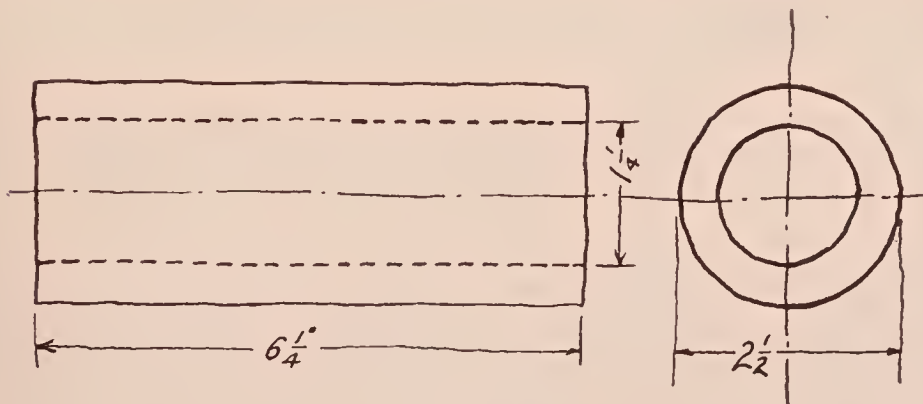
Preliminary sketch of front and right views of hollow cylinder
